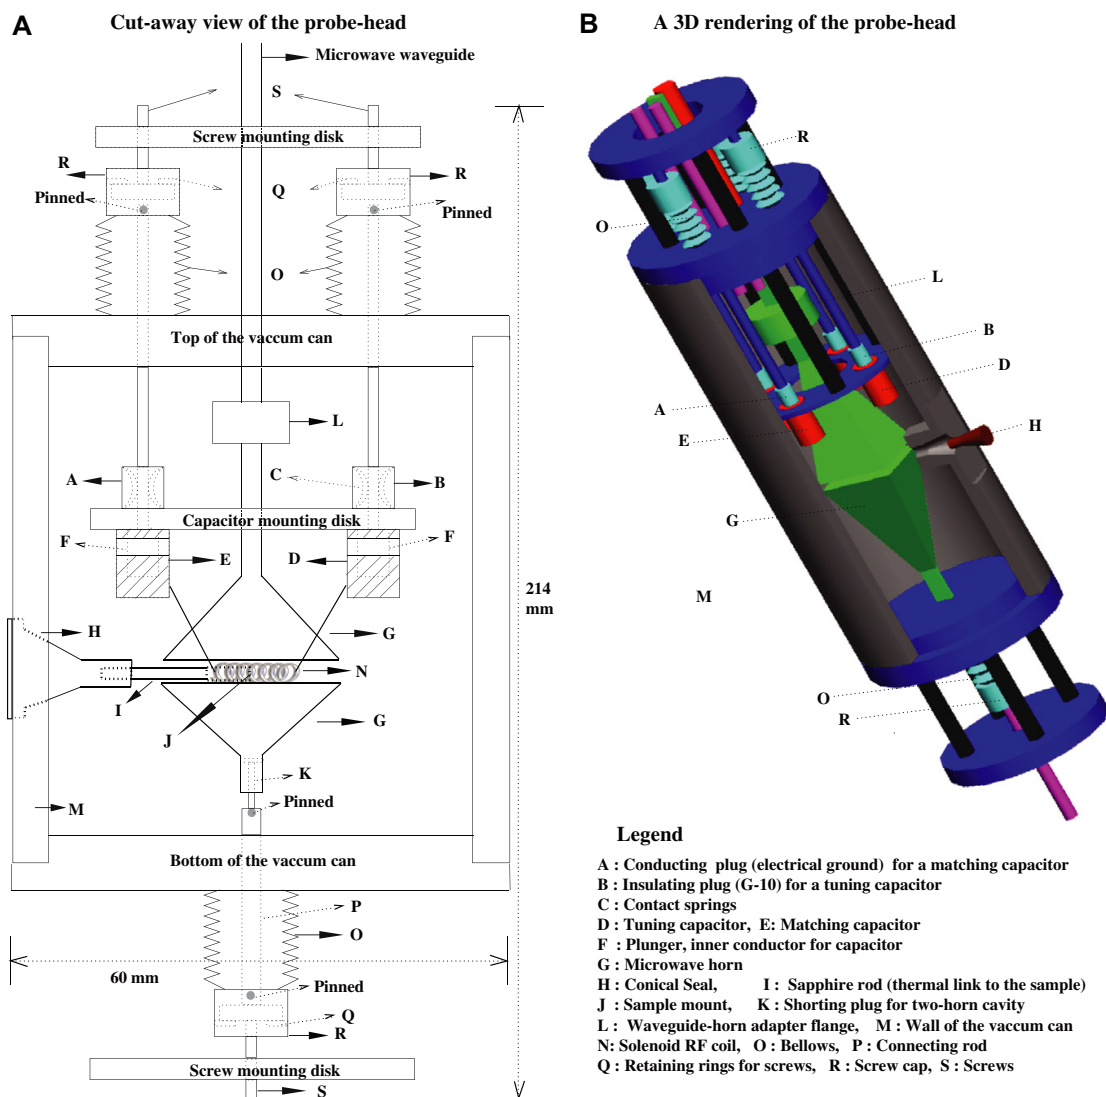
Probe assembly: (A) cut-away view; and (B) three-dimensional CAD drawing.
